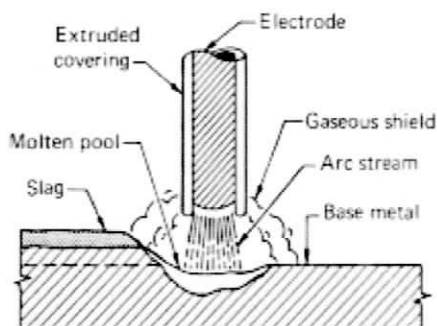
This shows how the coating on a coated (stick) electrode provides a gaseous shield around the arc and a slag covering on the hot weld deposit. (The James Lincoln Arc Welding Foundation, 2000)
